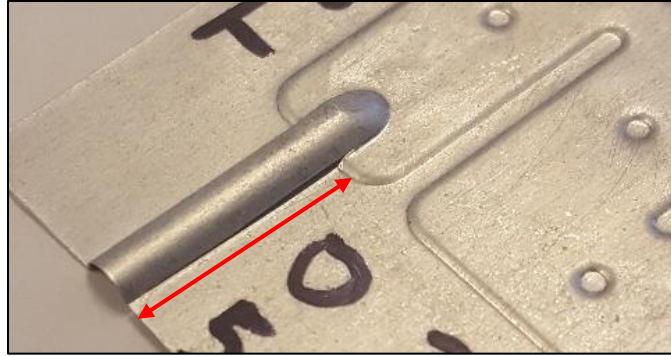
TC1: O-temper formed with Teflon lubrication at 250°C. A fracture runs along the I/O port radius, parallel to the red line drawn on the image.
